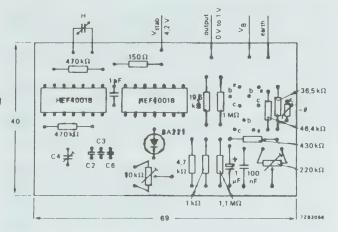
Printed circuit board equipped with components for connection to a meter.
